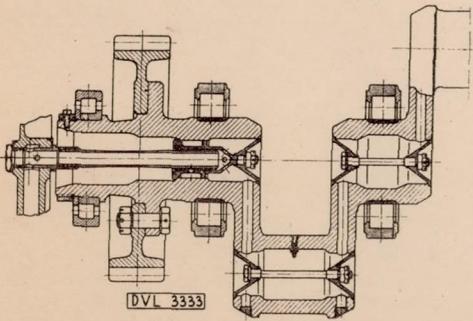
Crankshaft bearings of Jumo-4 Diesel engine.
